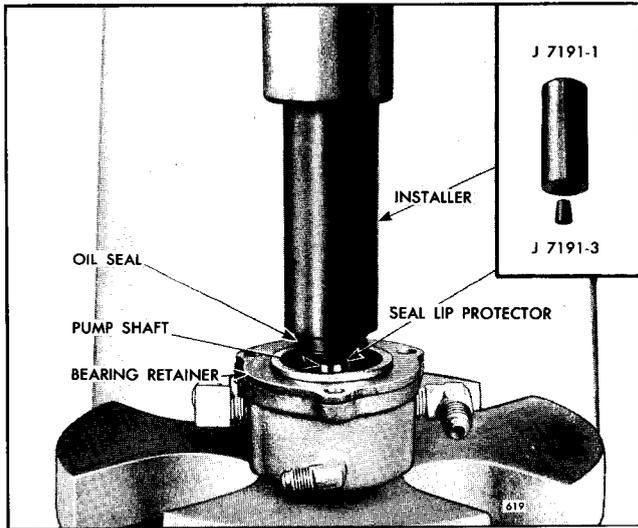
Installing Pump Shaft Oil Seal in Bearing Retainer
